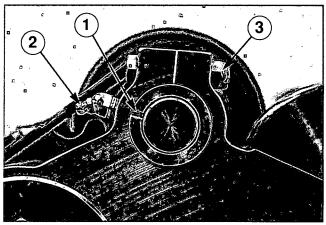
Keep the notch on the bearing aligned with grease fitting to insure proper lubrication. (1) Notch, (2) Grease Fitting, (3) Pinch Bolt.
